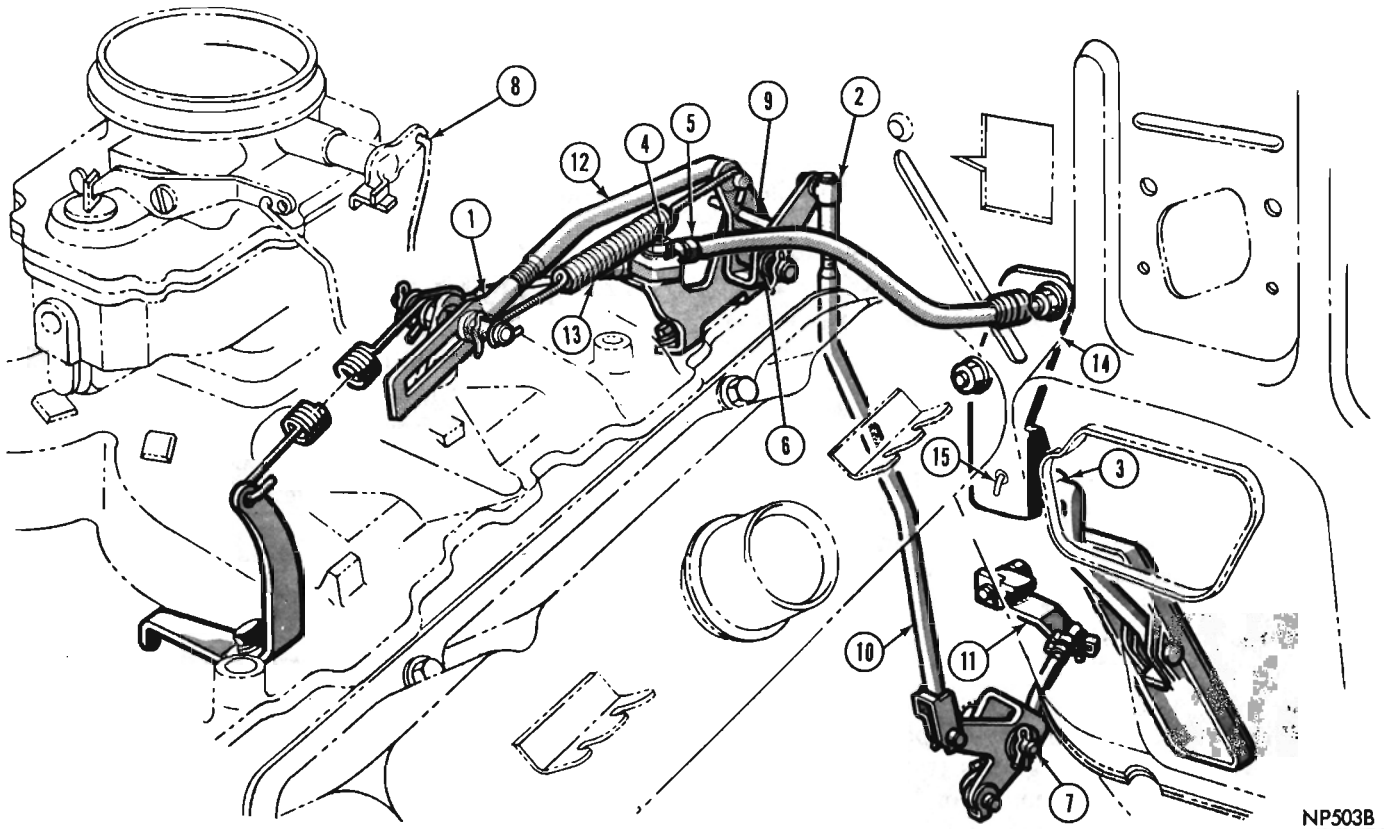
Throttle Linkage Adjustment (Valiant or Barracuda with 273, 318 or 340 Cu. In. Engine)
